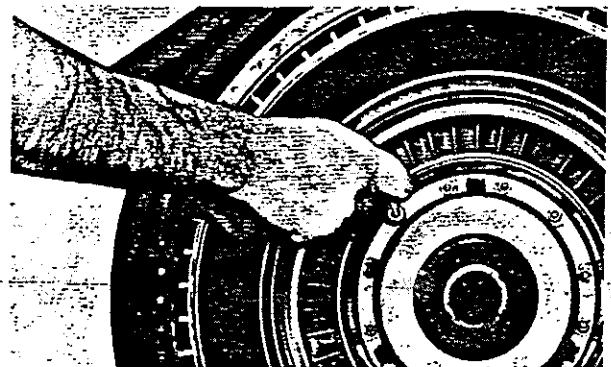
Removing Turbine Cooling Baffle Nuts
